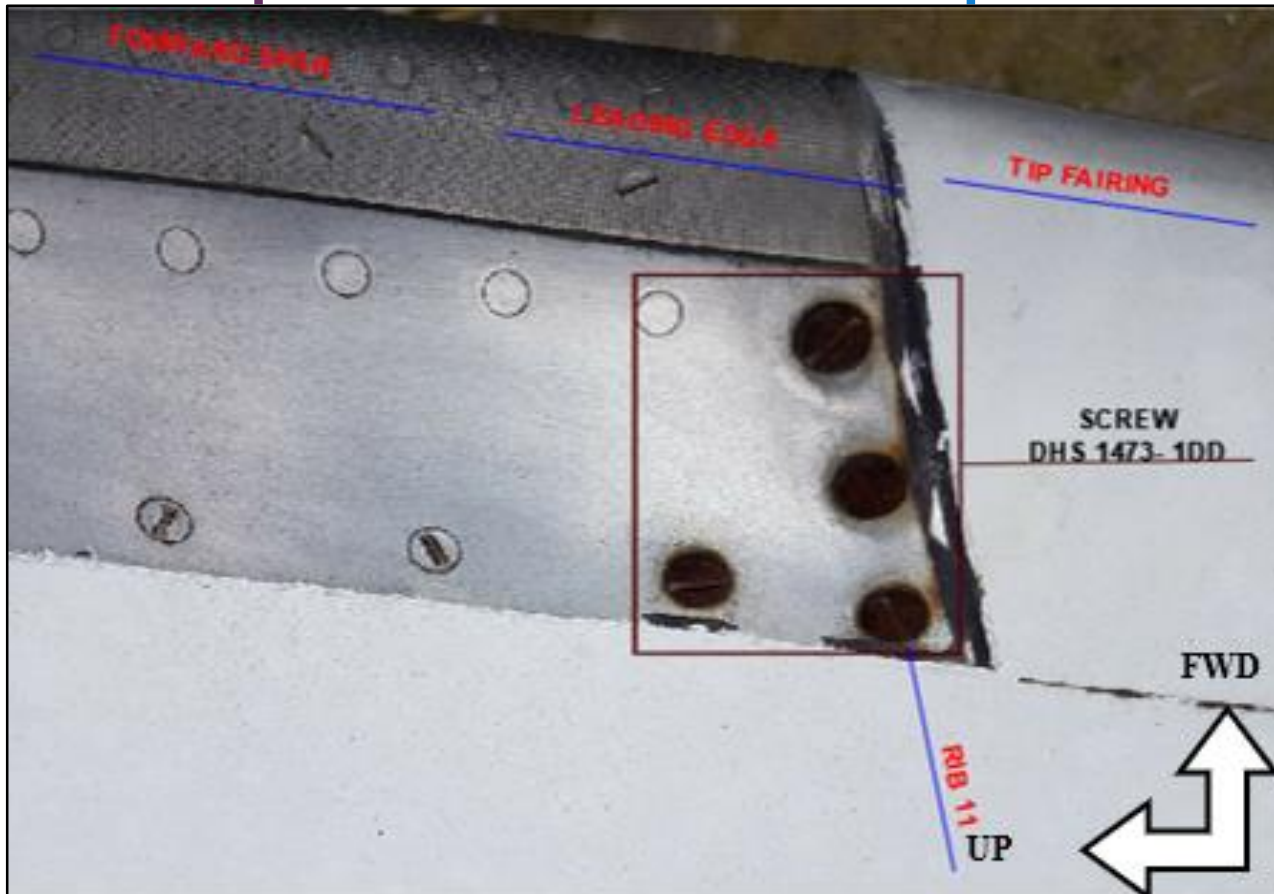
Example of Exact Location - Dents (Sheet 1) - Corrosion (Sheet 2)
